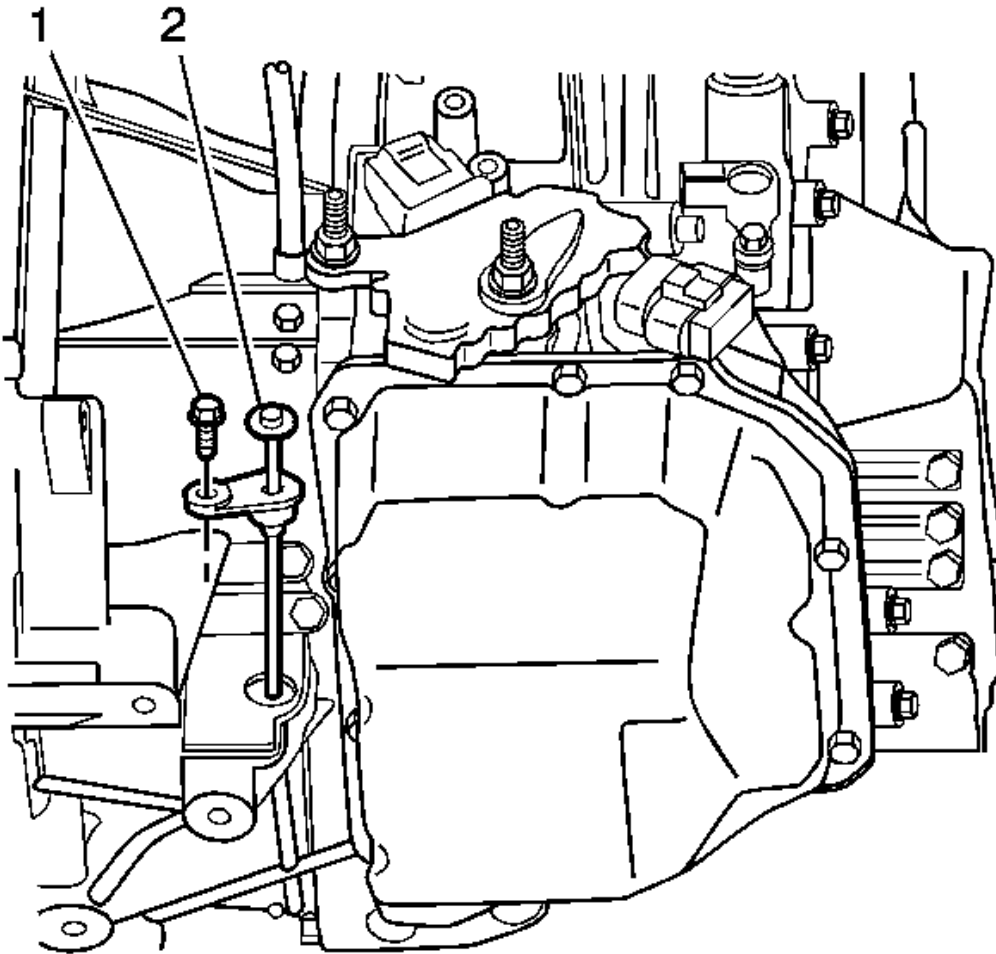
View Of Shift Control Cable Terminal And Retainer
